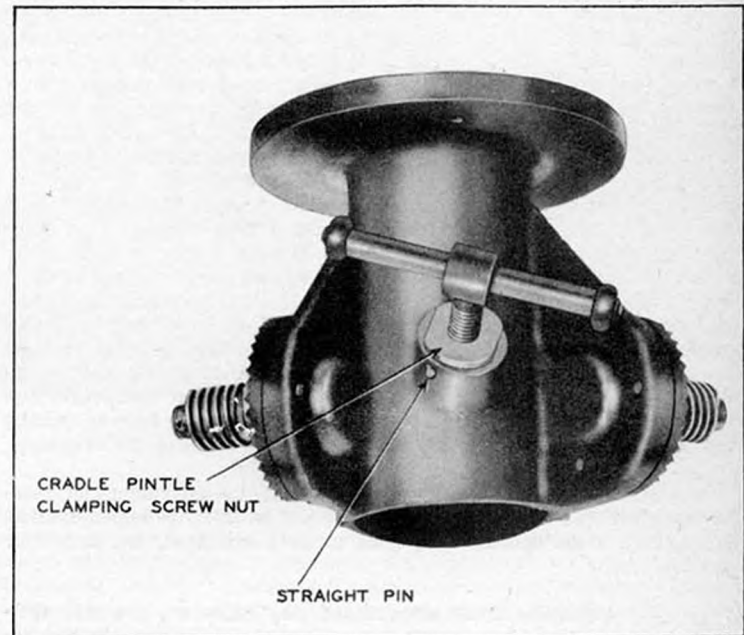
Location of cradle pintle clamping screw nut, and straight pin which secures the former in place.
